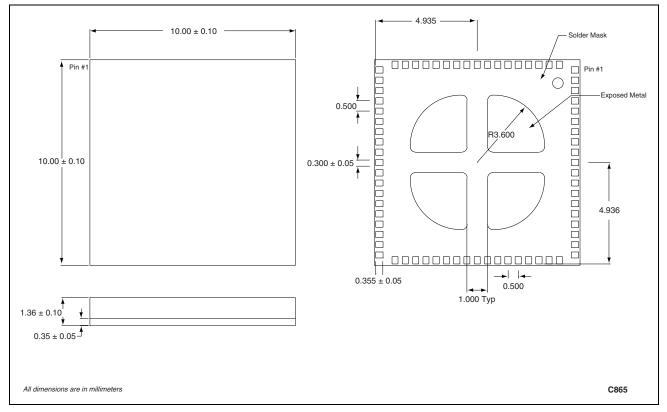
CX74016 Package Dimensions – 72-Pin LGA
